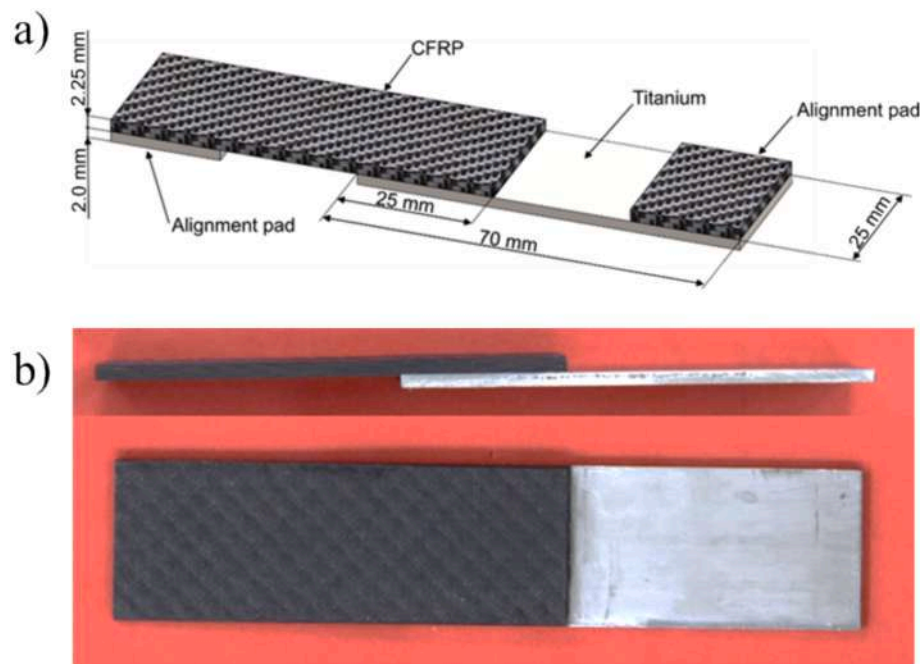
Single lap joint: a) geometry and dimensions; b) Image.
